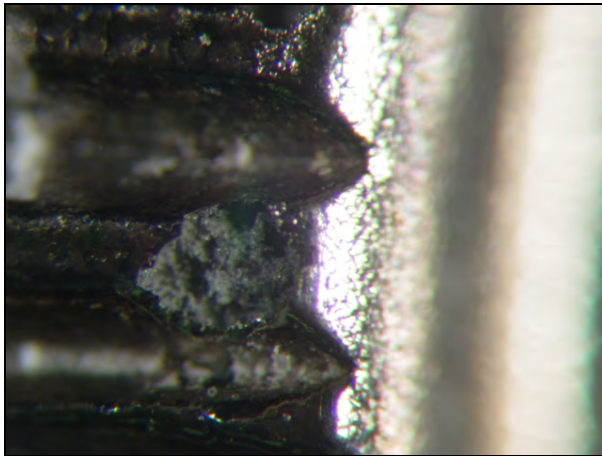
1-4 and B0a1-7. Pitting on the coupling ring flutes and rear accessory threads of an M38999 class W control samples following salt spray.
